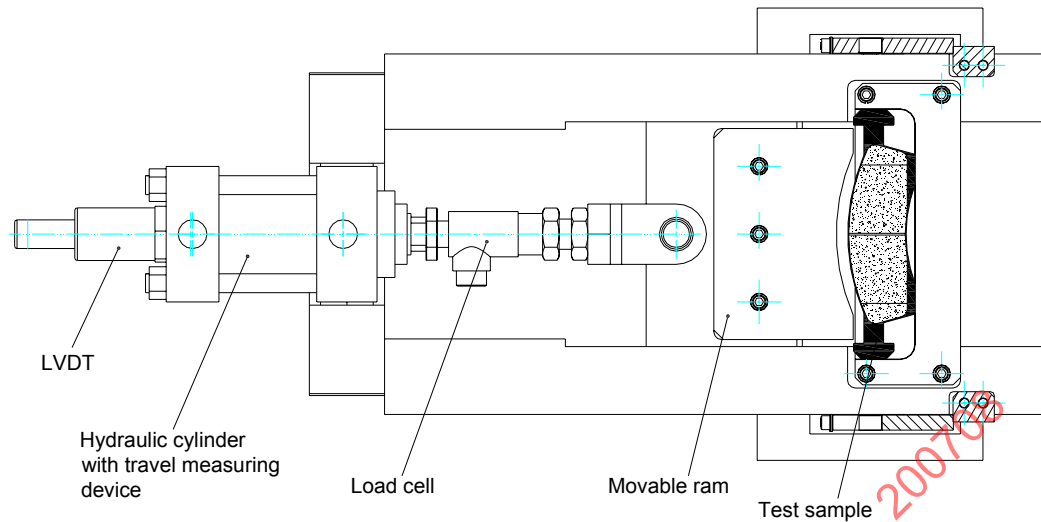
DISC BRAKE SHEAR TEST FIXTURE
